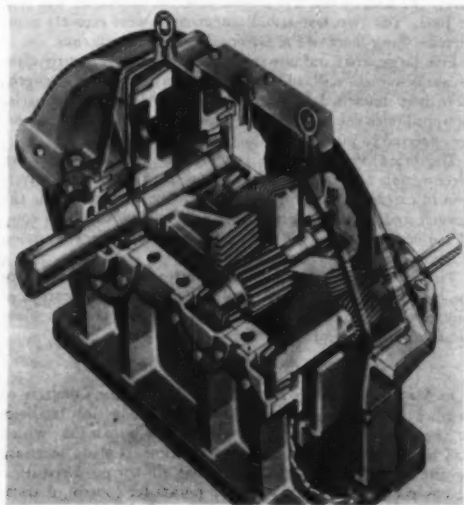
HORIZONTAL-TYPE DOUBLE-REDUCTION SPEED REDUCER
